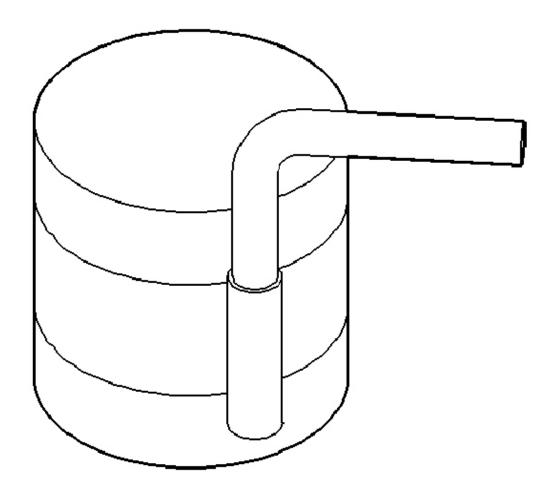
Piston Ring Compressor C-385 Courtesy of CHRYSLER LLC
